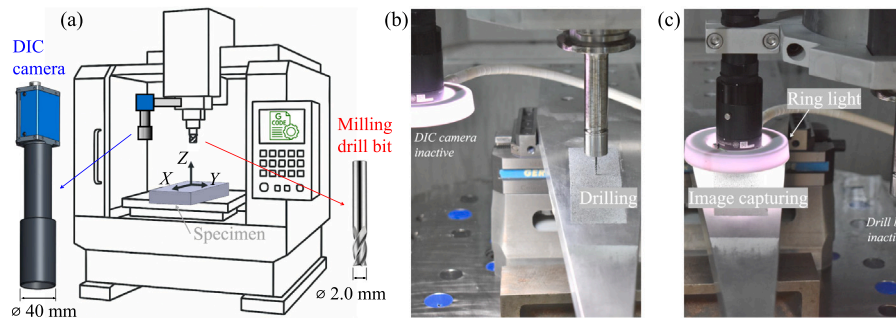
(a) Camera and drill setup on CNC machine; (b) Drill bit aligned for a drilling step; (c) Camera aligned to capture post-drilling displacement field.
